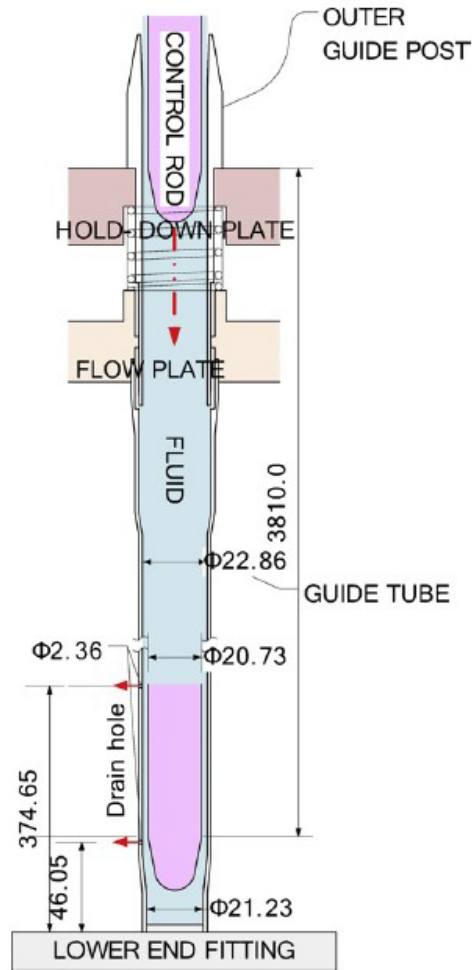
Control rod guide tube in a PWR assembly showing insertion of a control rod.
